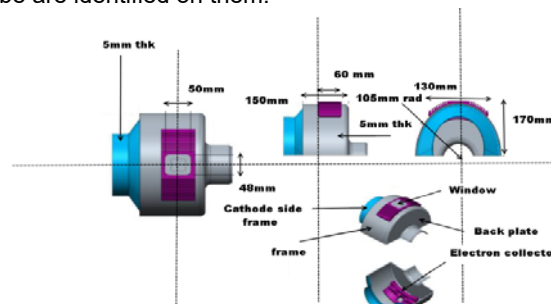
3D design of x-ray tube from outside and inside with dimensions.
